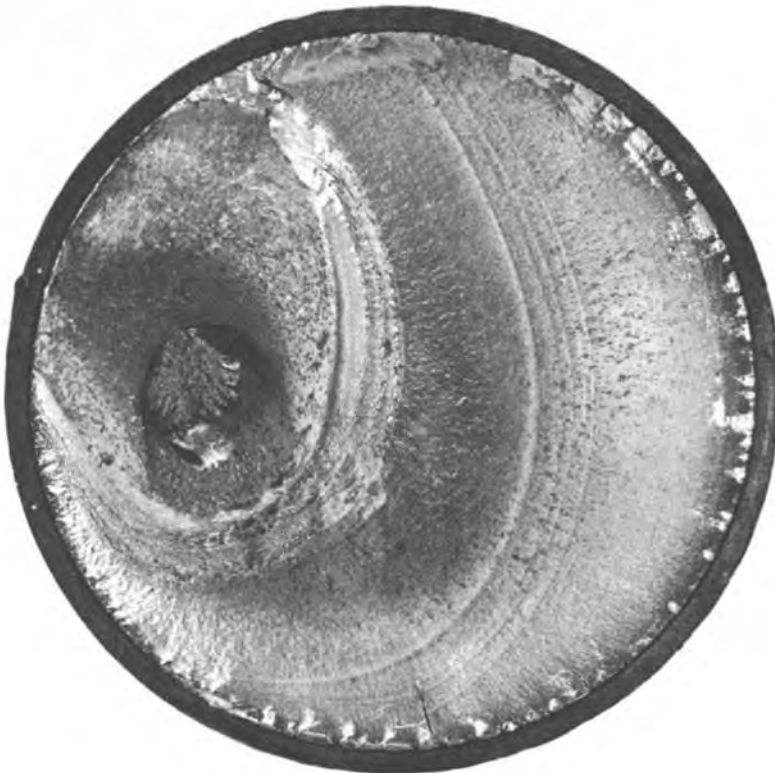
Surface of a fatigue fracture in a 1050 steel shaft, with hardness of about 35 HRC, that was subjected to rotating bending. Presence of numerous ratchet marks (small shiny areas at surface) indicates that fatigue cracks were initiated at many locations along a sharp snap-ring groove. The eccentric pattern of oval beachmarks indicates that the load on the shaft was not balanced; note final rupture area (stage 3) near left side.
